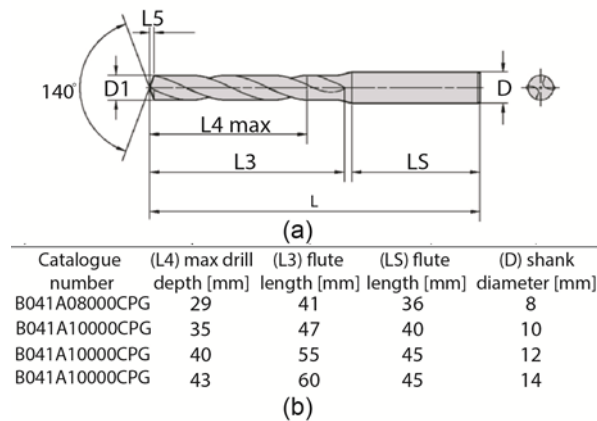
Cutting tool; a) Geometry details and b) Dimensions
